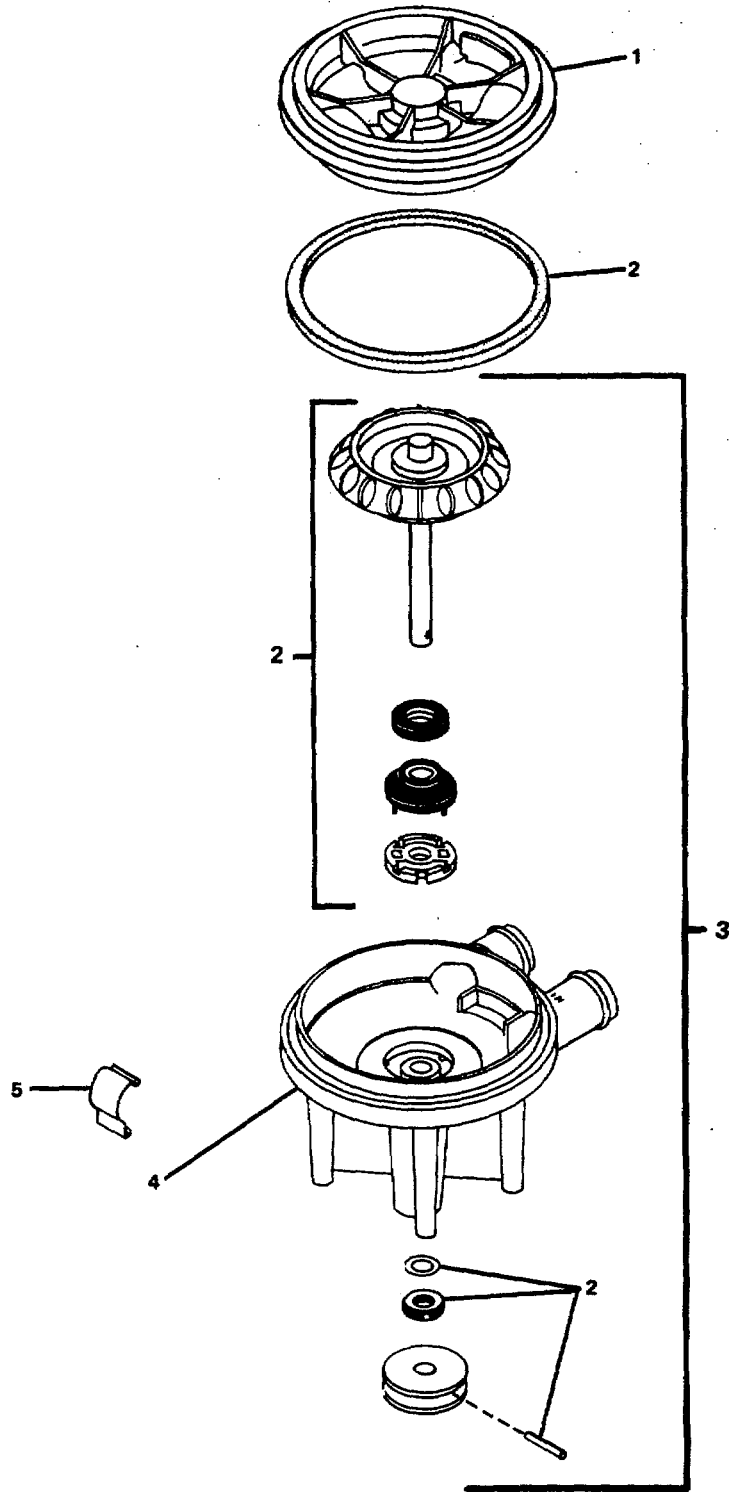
Washer Machine Centrifugal Pump.
